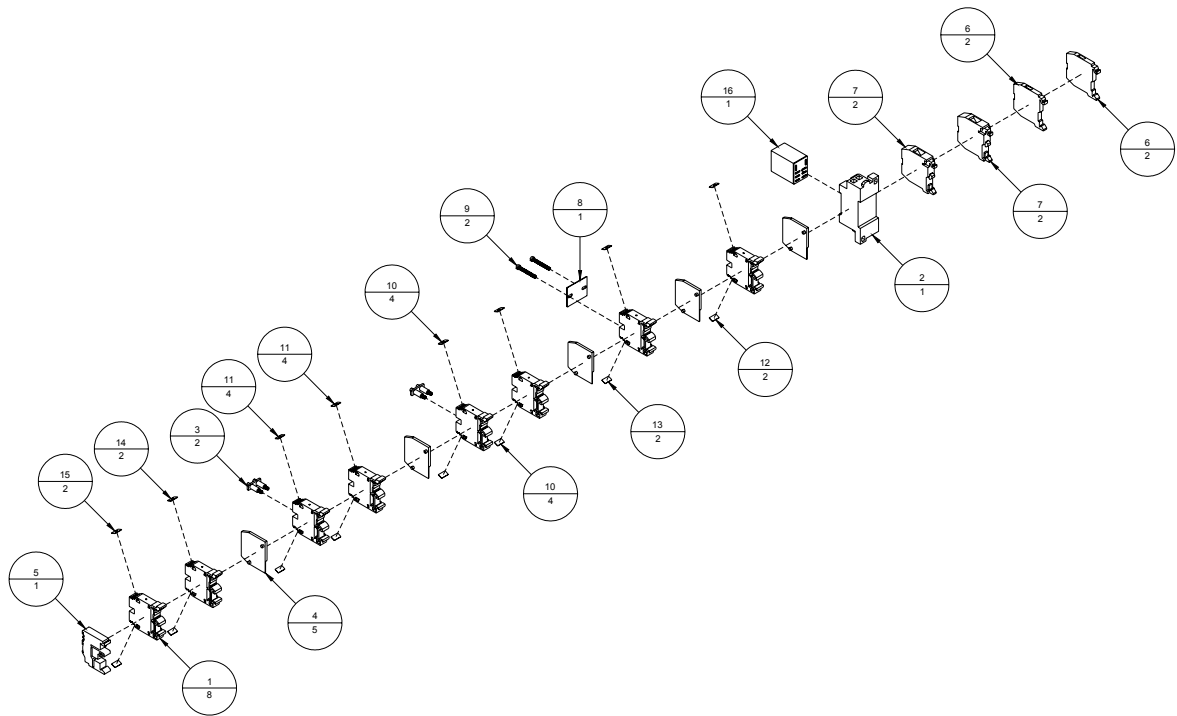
Terminal Block Assembly, 230 VAC, BK6OB (9102442A)
